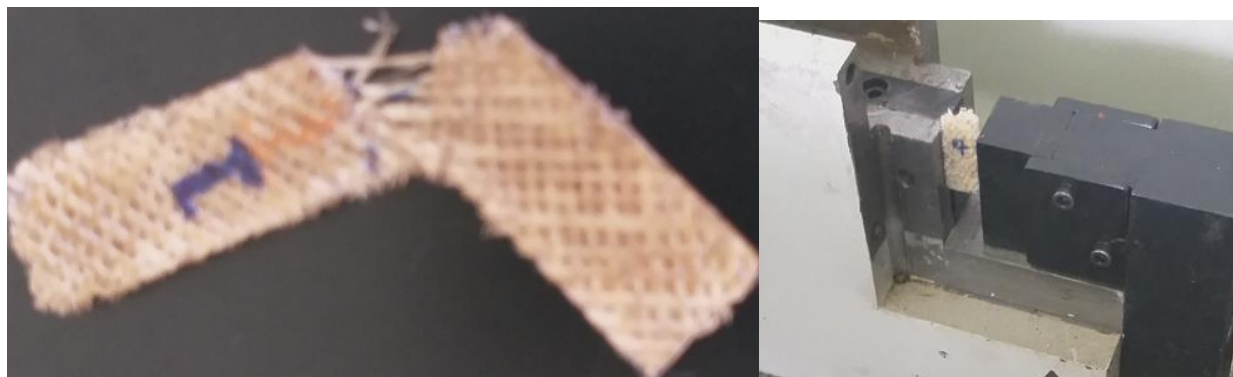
unseparated test specimen after impact (left) and separated test specimen (right)
